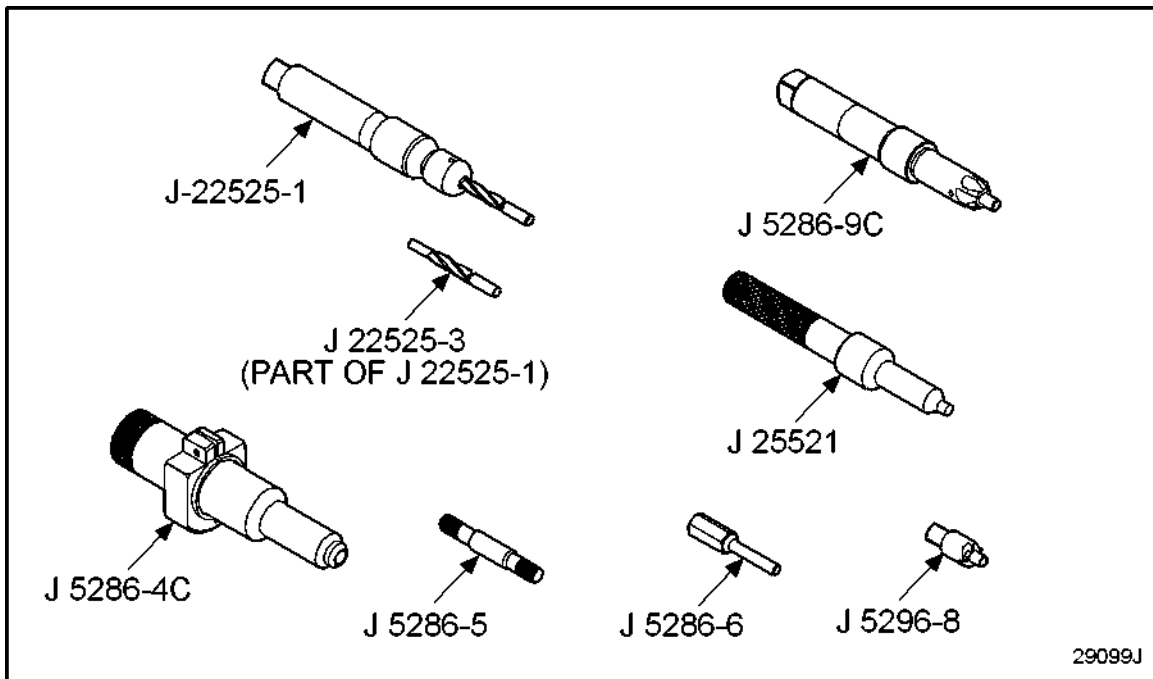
Injector Tube Reconditioning Set J 22525-B
